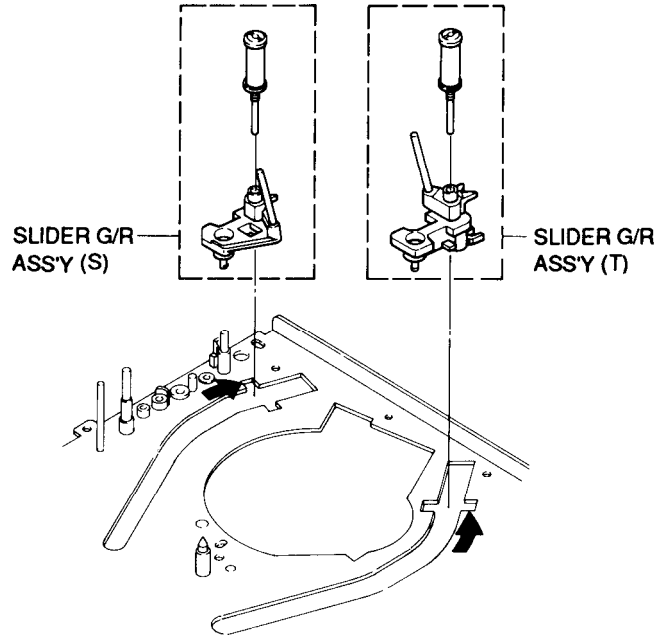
Slide Guide Roller "S", "T" Ass'y Removal
